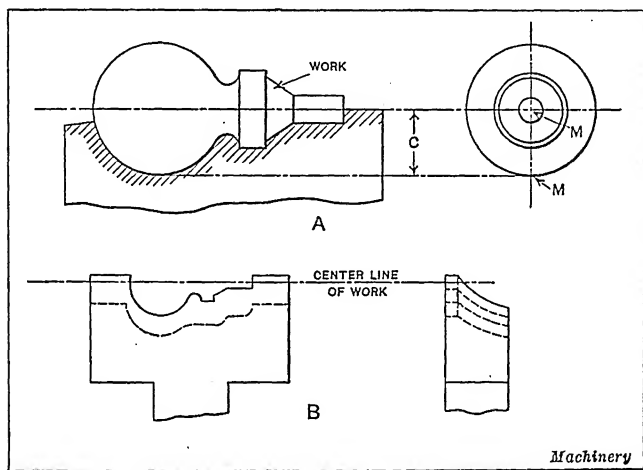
(A) Example of Work. (B) Shaper Tool used for making Formed Tool for Screw Machine
